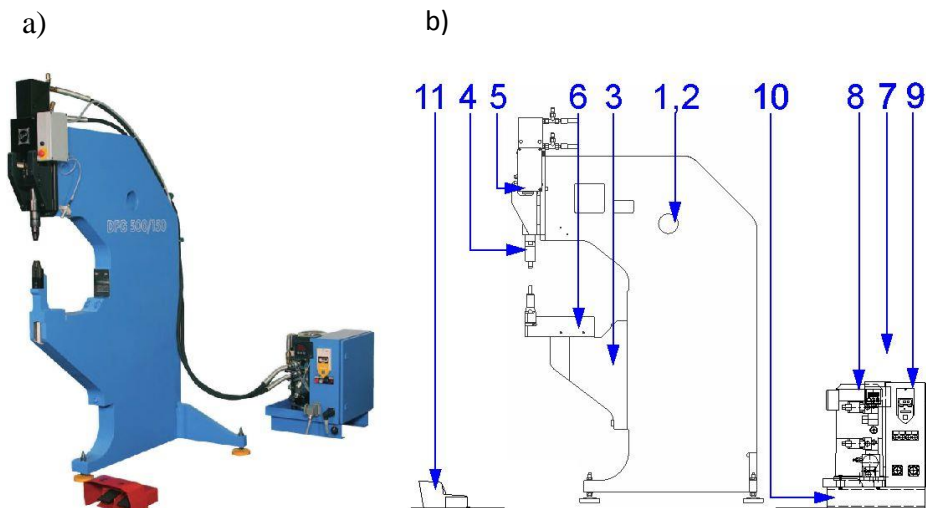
C-type DFG 500/150 DW Eckold clinching machine [11]: a) general view, b) machine diagram
